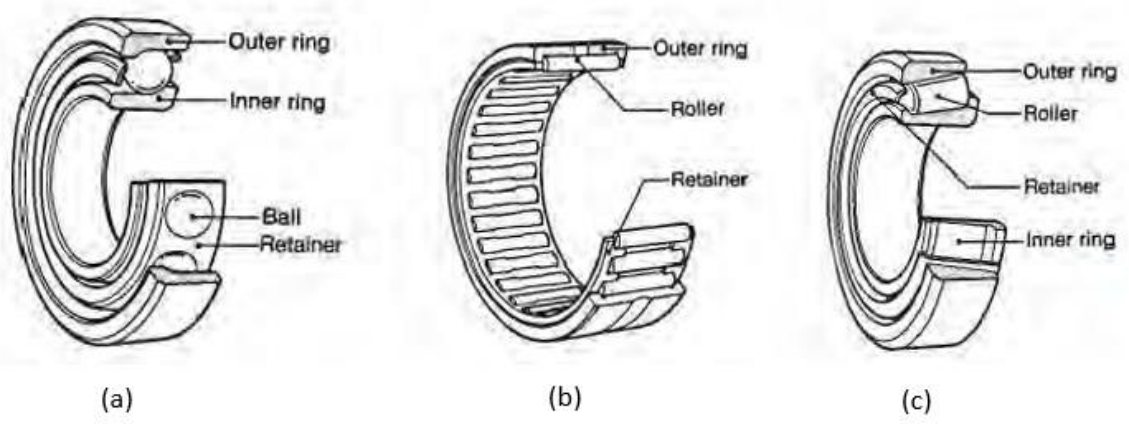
Different types of rolling-element bearings. (a) Angular contact ball bearings. (b) Needle roller bearings. (c) Tapered roller bearing [3].
